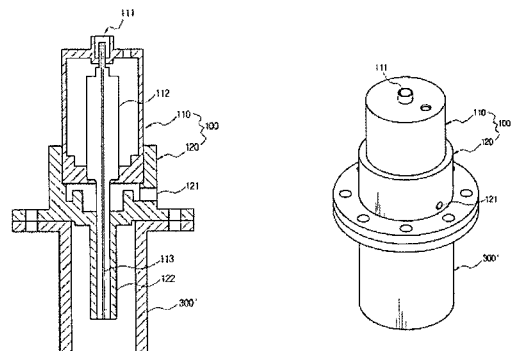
The design of ultrasonic injector (100: injector, 111: fuel inlet, 112: nozzle head, 120: cooling housing, 121: coolant inlet, 122: coolant outlet)
